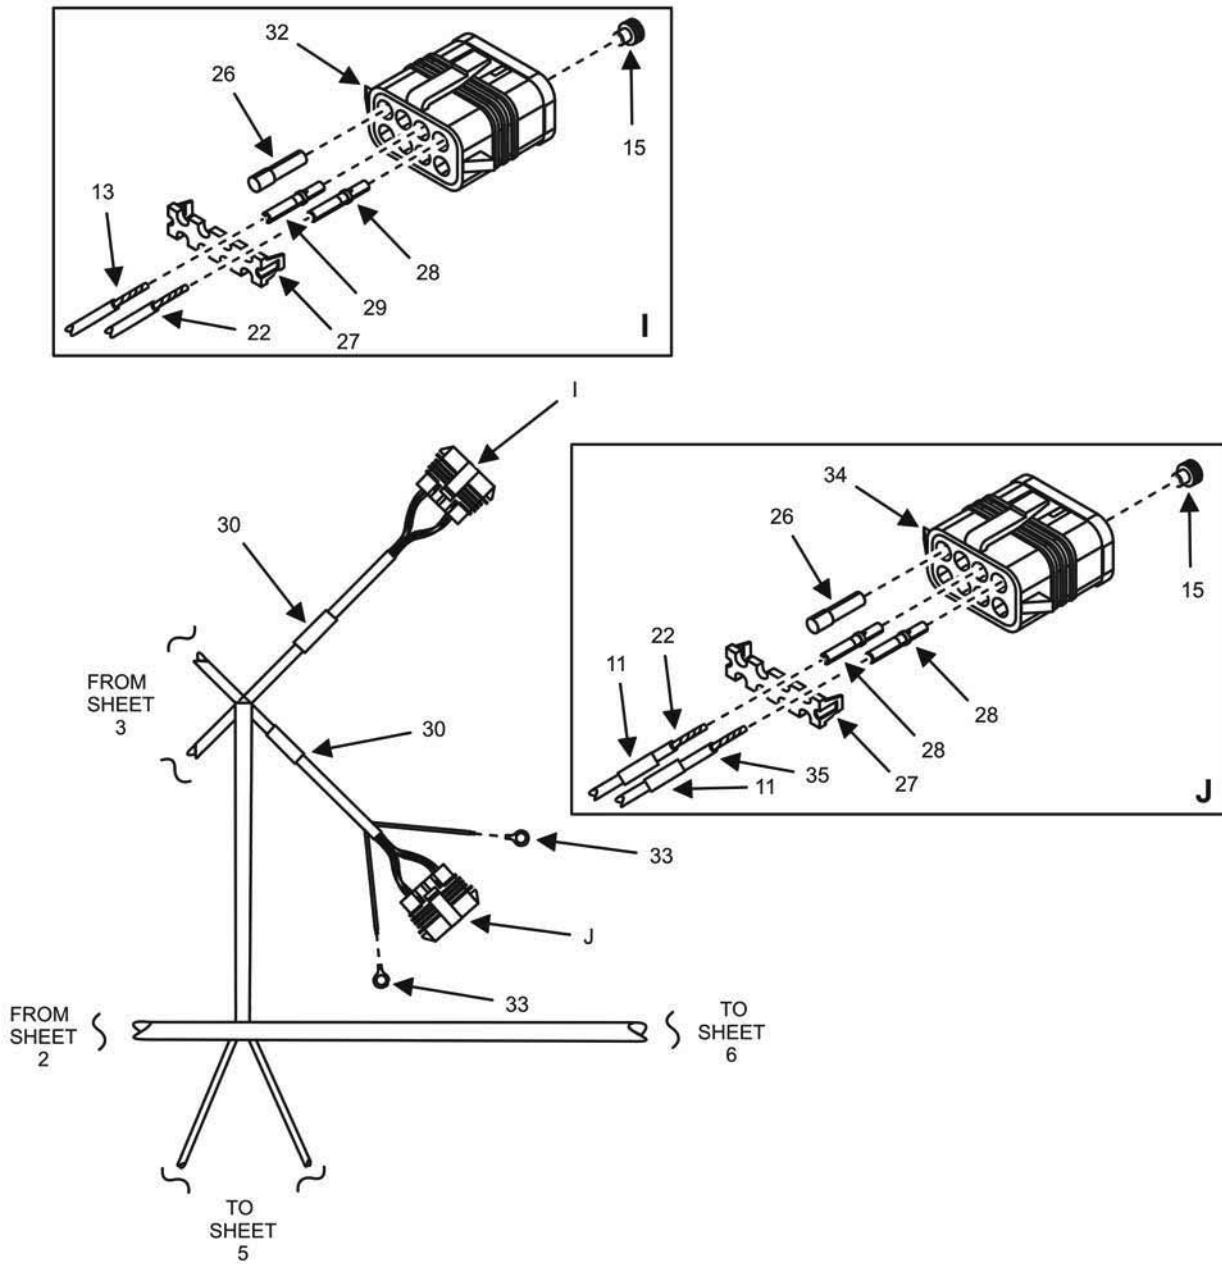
Engine Wiring Harness (Sheet 4 of 14).
